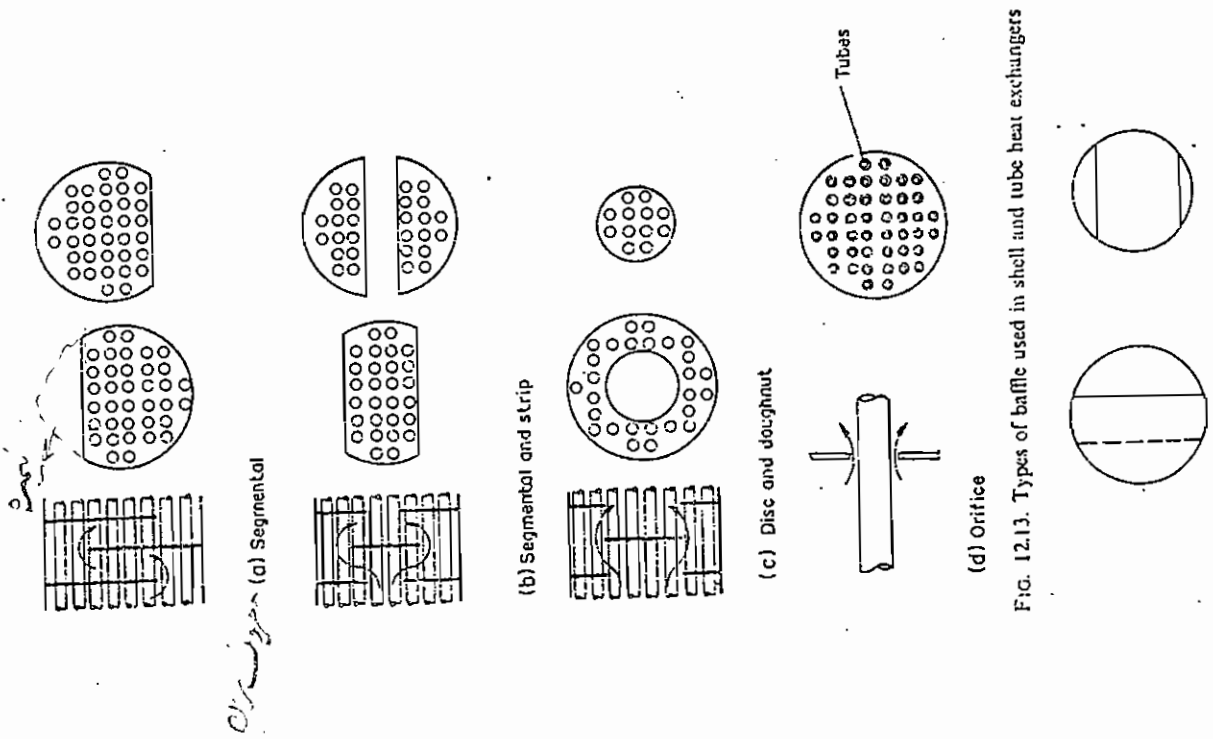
Types of baffle used in shell and tube heat exchangers
